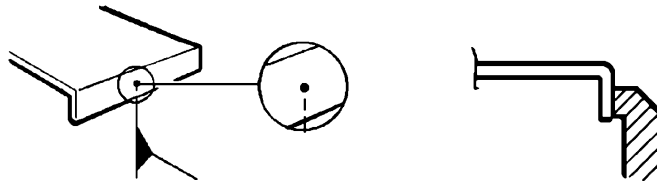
A contact lug and its locating feature. A contact lug guides the part in one direction.
